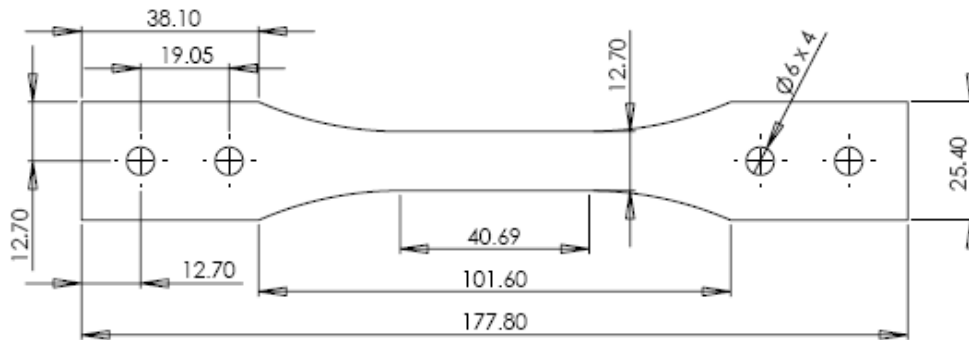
Creep test specimen dimensions used in this study. [72]
